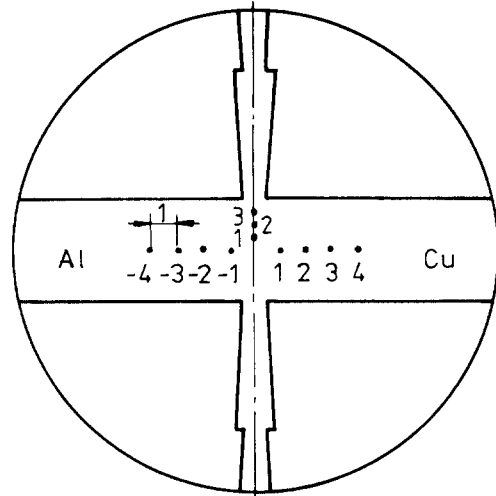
Specimen of hardness test for cold pressure welded joint.
